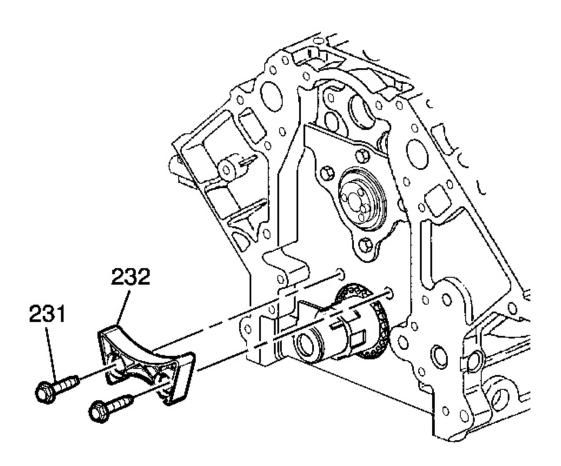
Timing Chain Dampener & Bolts Courtesy of GENERAL MOTORS CORP.
